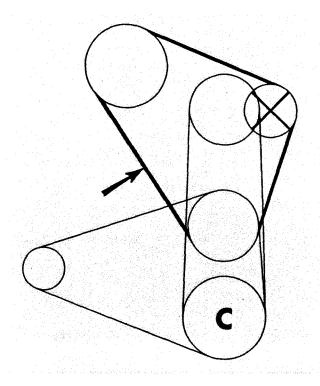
FIG. D AIR COMPRESSOR DRIVE WITH HIGH MOUNT FAN DRIVE
